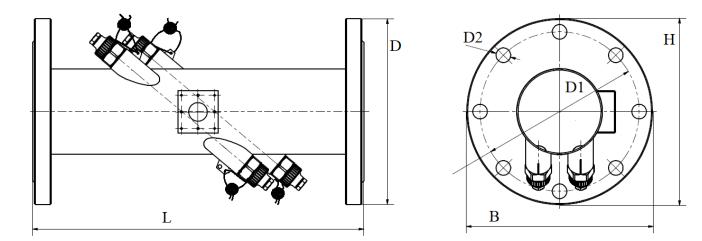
Dimensions of flow sensors DN50, DN65, DN80, DN100 (Brass housing)
